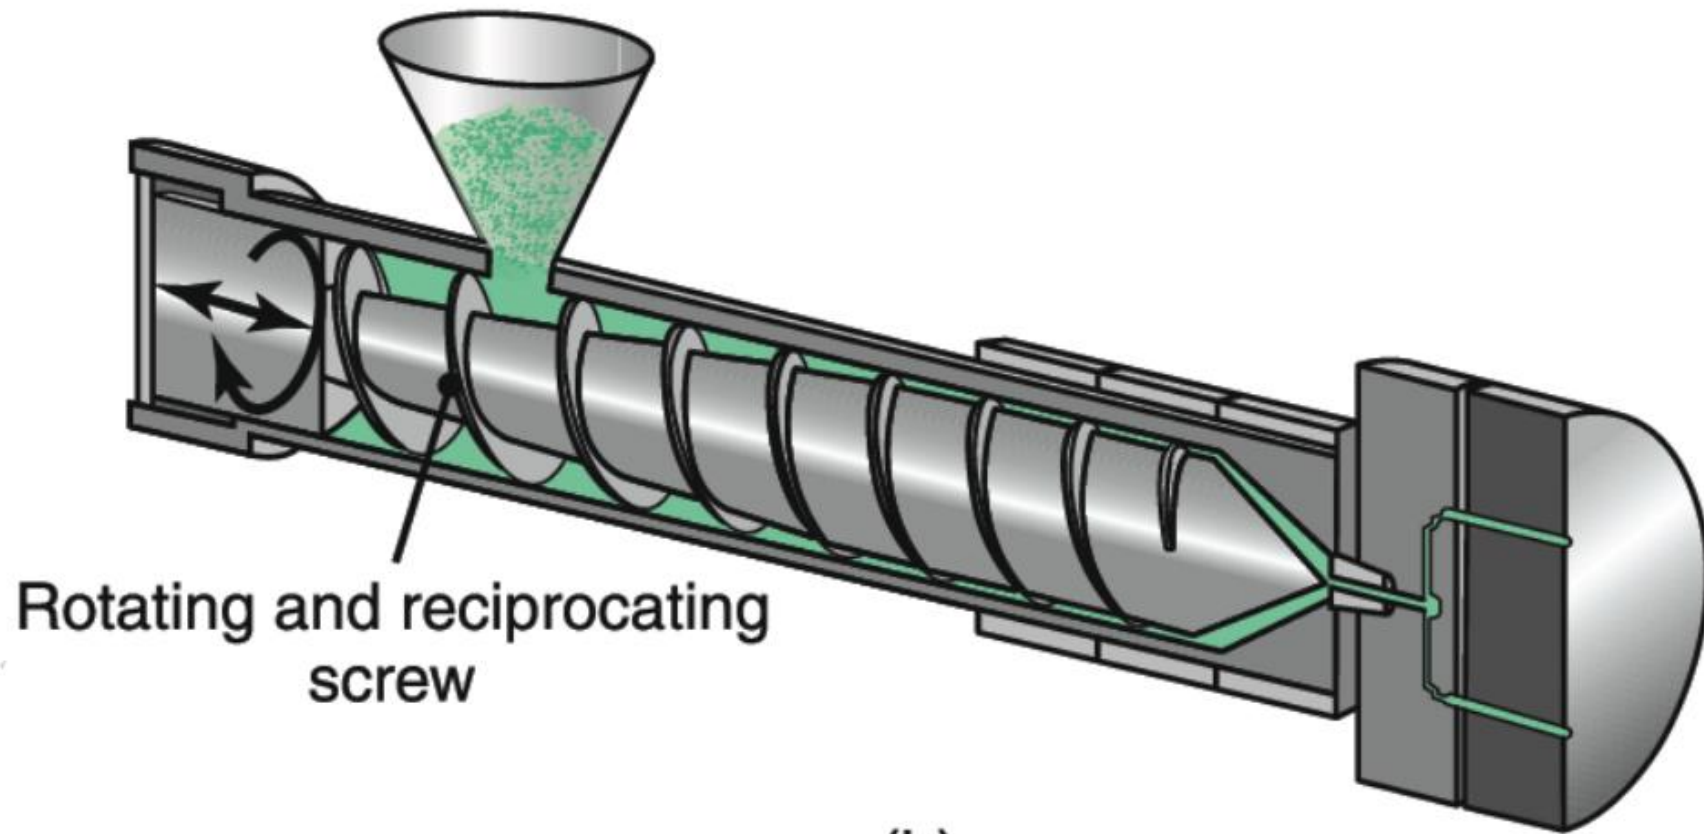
Injection molding with reciprocating rotating screw (螺杆)
